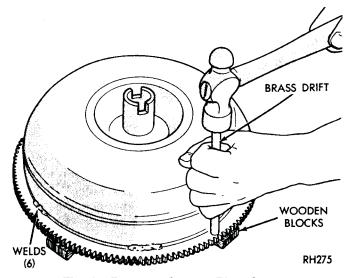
Remove Starter Ring Gear (Nonlock-Up Only)
